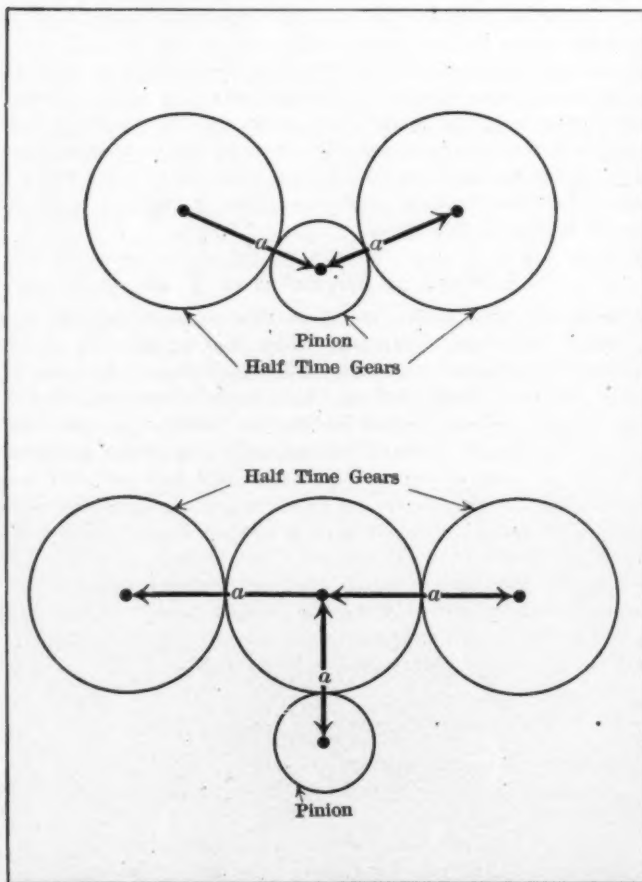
Diagrams of the schemes of halftime gearing as used in automobile motors
